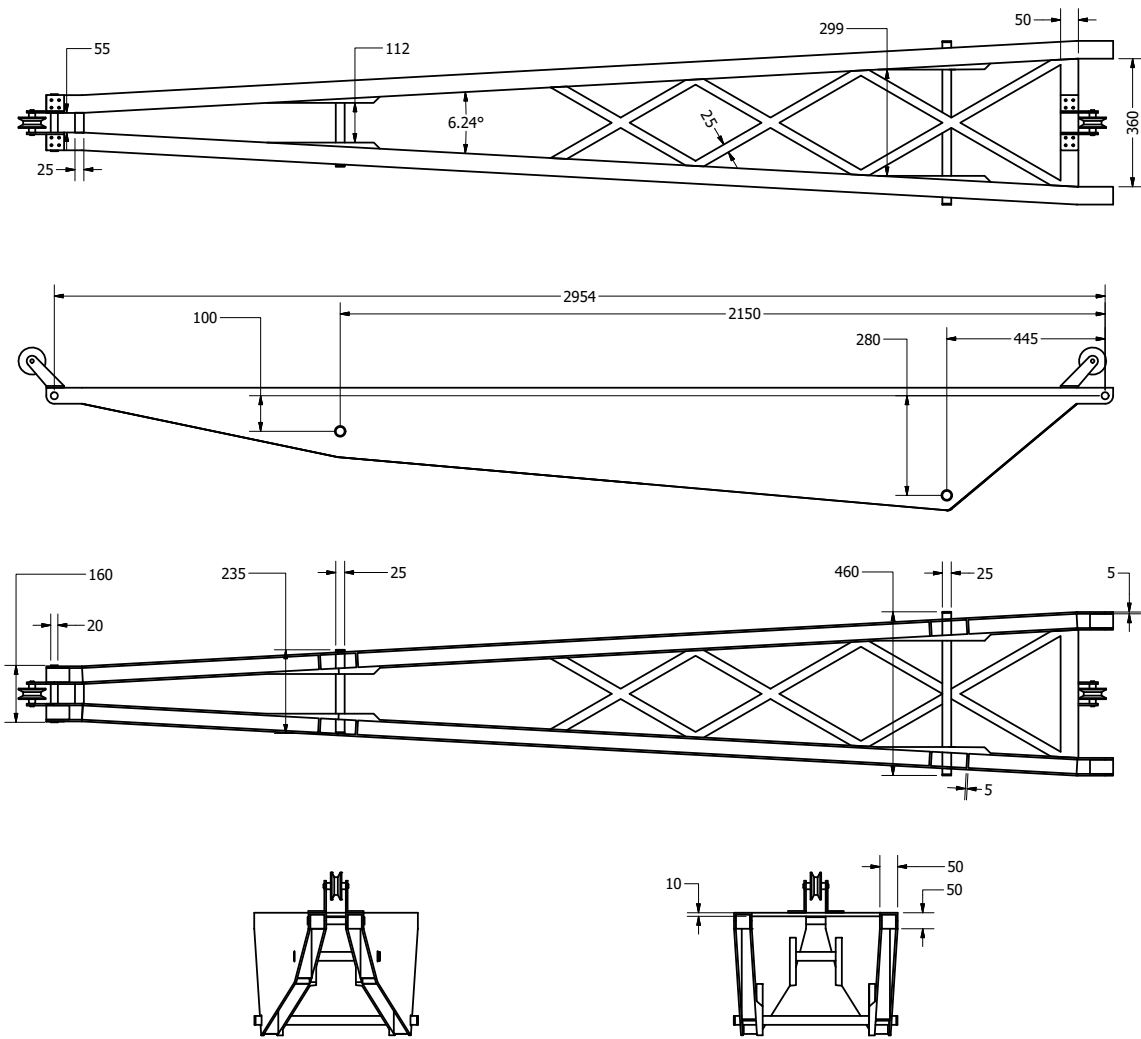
Long Lower Arm Final Design, all dimensions are mm
